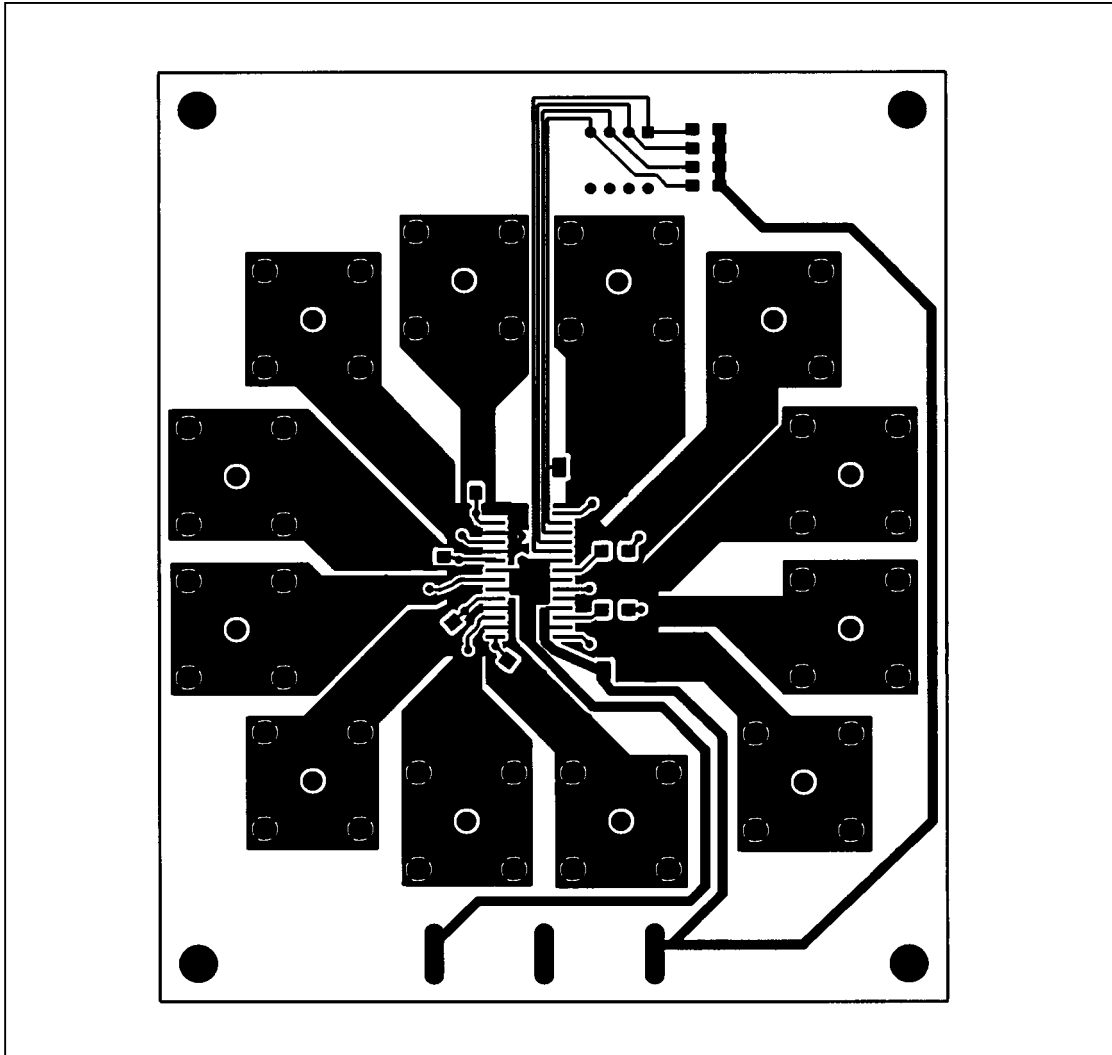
MAX464/MAX466 EV Kit PC Board Layout—Component Side
